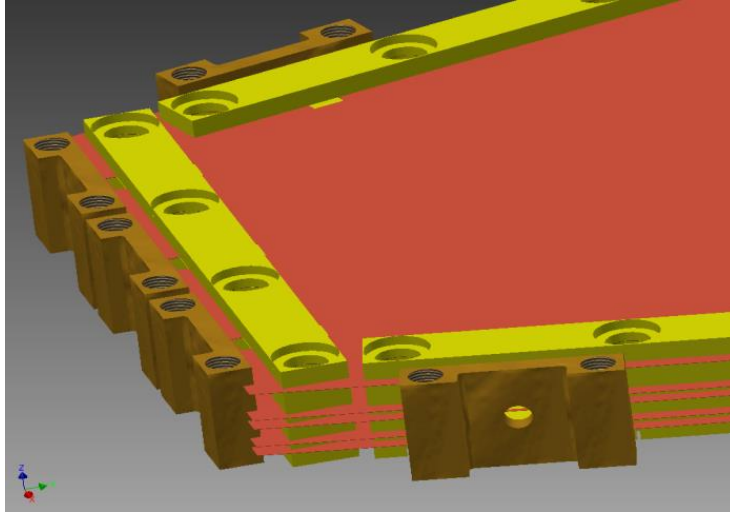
CAD drawing showing the Triple-GEM detector design to be assembled with the modified mechanical stretching technique. Five foils (red) are sandwiched between small inner frame pieces (olive green) that get stretched against posts (brown). The posts themselves are to be sandwiched between large stiff outer frames (not shown) to provide mechanical stability.
